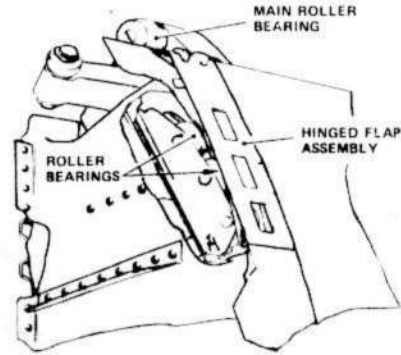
CREW ESCAPE HATCH - REMOVAL AND ASSEMBLY
